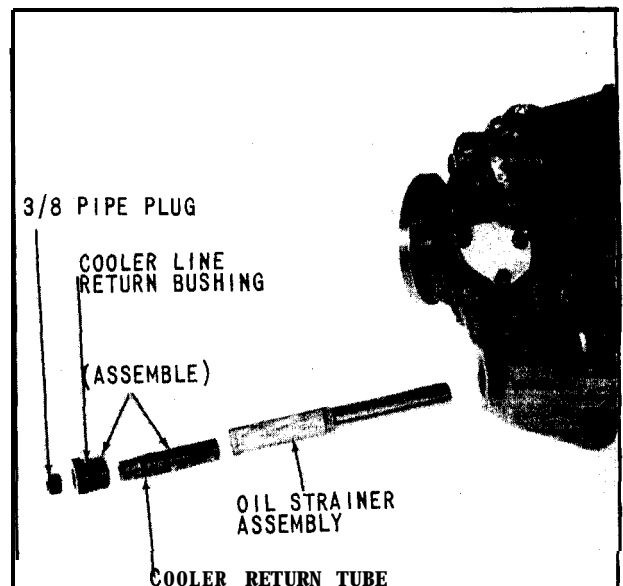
Installing Oil Strainer & Cooler Return Tube & Bushing Assembly
